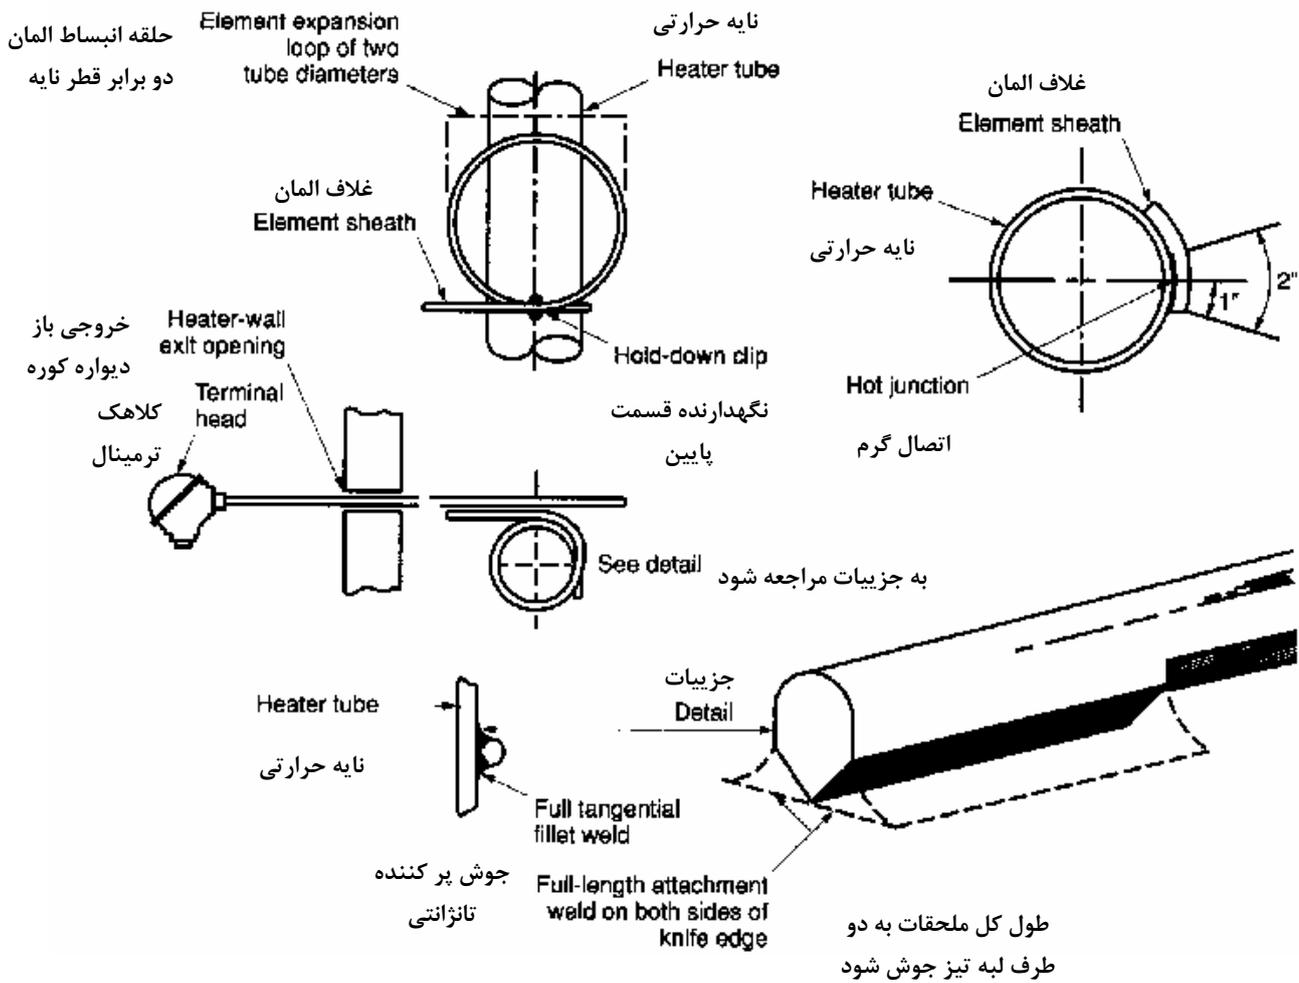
KNIFE EDGE TUBE SURFACE THERMOCOUPLE FOR HEATER TUBE
